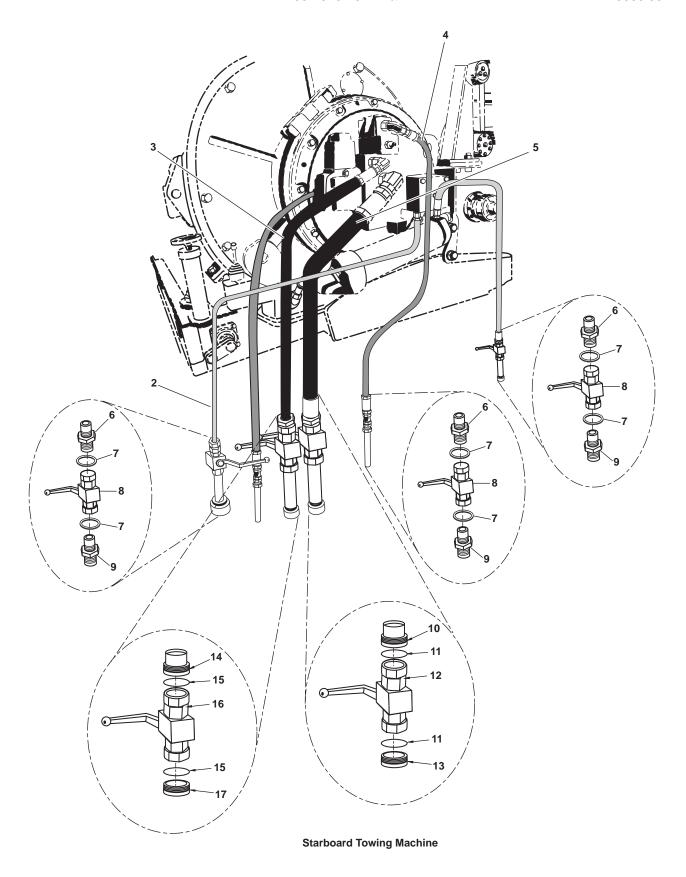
Towing Machine, Double Drum (Sheet 2 of 11)
